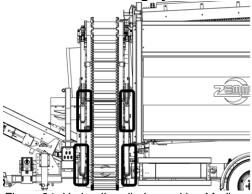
Hydraulic cylinder position Medium fraction long (9-16) Short version (9-12, bottom only)
